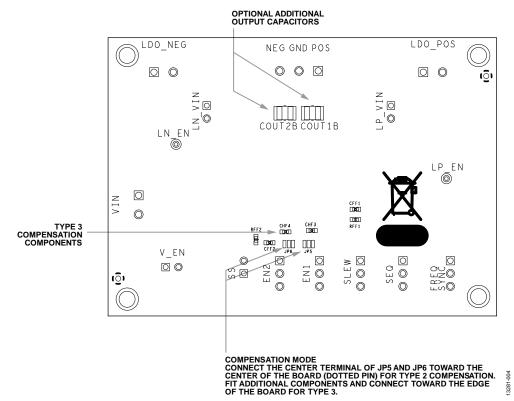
Bottom of Evaluation Printed Circuit Board (PCB) Showing Locations for Optional Components
